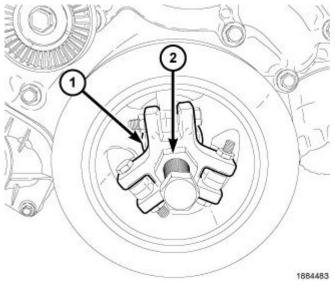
Removing Crankshaft Damper Courtesy of CHRYSLER LLC
